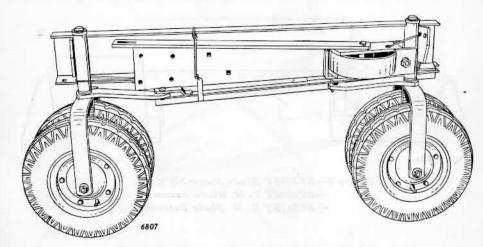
AC3103 Y Rear Wheel Assembly (1).
